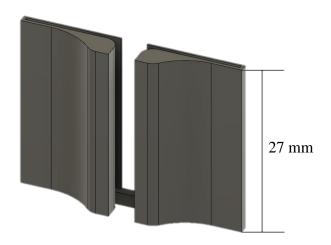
Design of part to adapt to bending machine to achieve bending radius of r=1.25 mm
